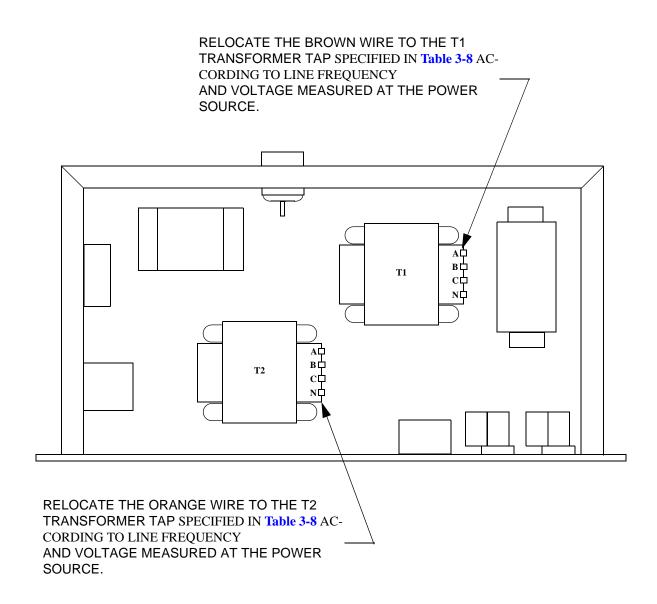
1020R Compressor Control Module Modifications (Cover Removed)
